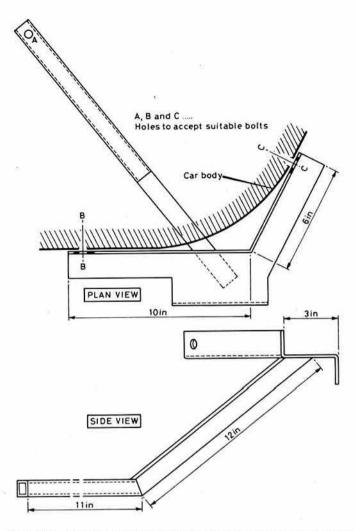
This shows the support bracket for the antenna. Bolt A is one of a number round the petrol tank circumference. Bolts B and C are those used to hold the bumper in place. The material used is mild steel angle of side 1.5in and 1in square section hollow bar. The finished bracket should be well cleaned and coated with a ferrous metal primer and top coat
